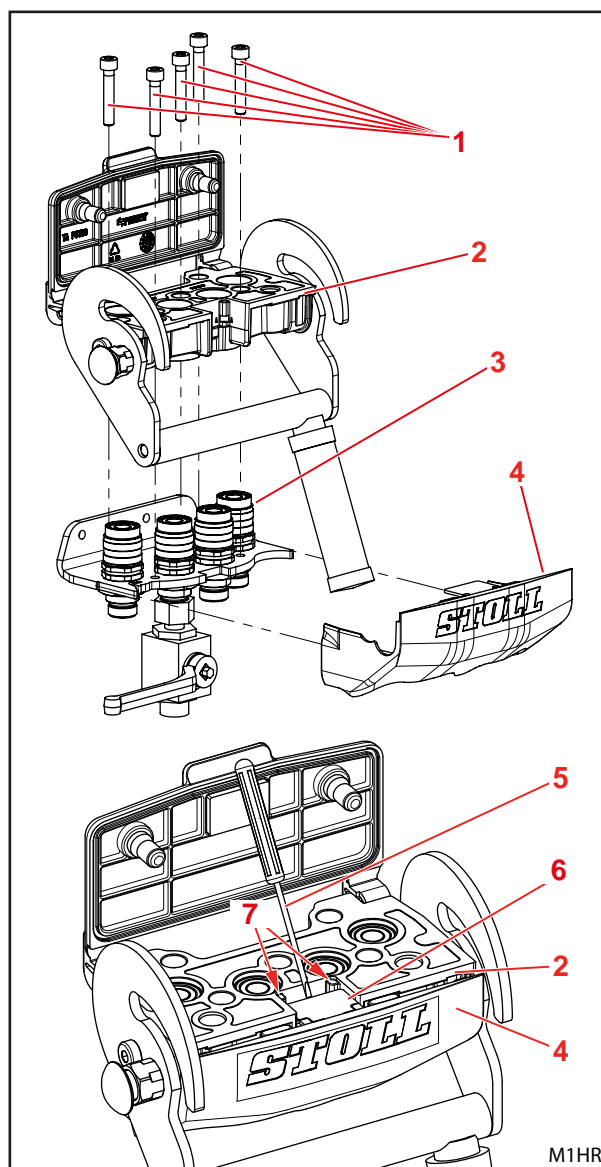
Installing the Hydro-Fix lower part without electrical system
